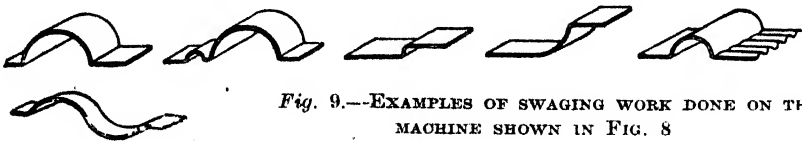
EXAMPLES OF SWAGING WORK DONE ON THE MACHINE SHOWN IN FIG. 8
